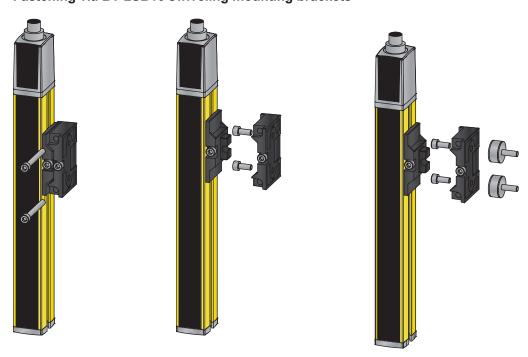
Mounting via swiveling mounting brackets BT-2SB10
